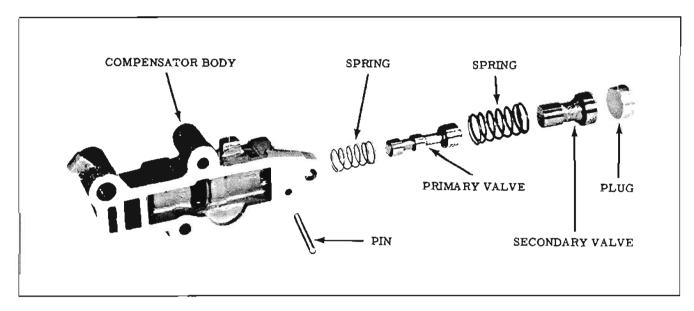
Two Stage Compensator Valve ("OA", "OB" and "OBH")
